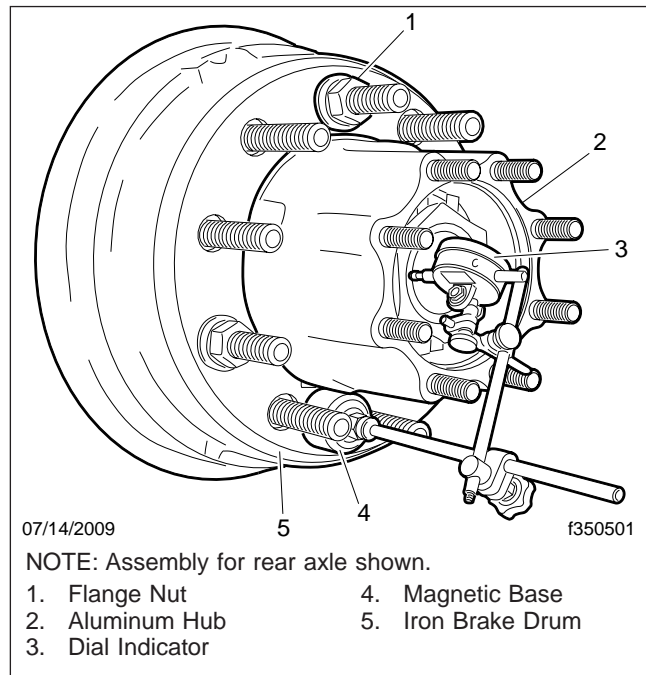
, Dial Indicator Setup, Aluminum Hub with Iron Brake Drum
